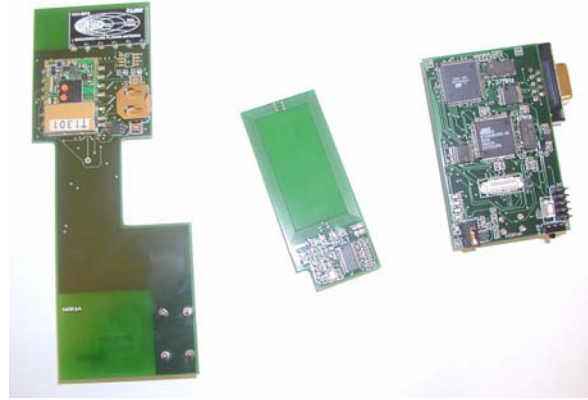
Actual Assembled PCB Boards. From left to right: Location Add-On Module, NFC Add-On Module & Smart Sleeve.
